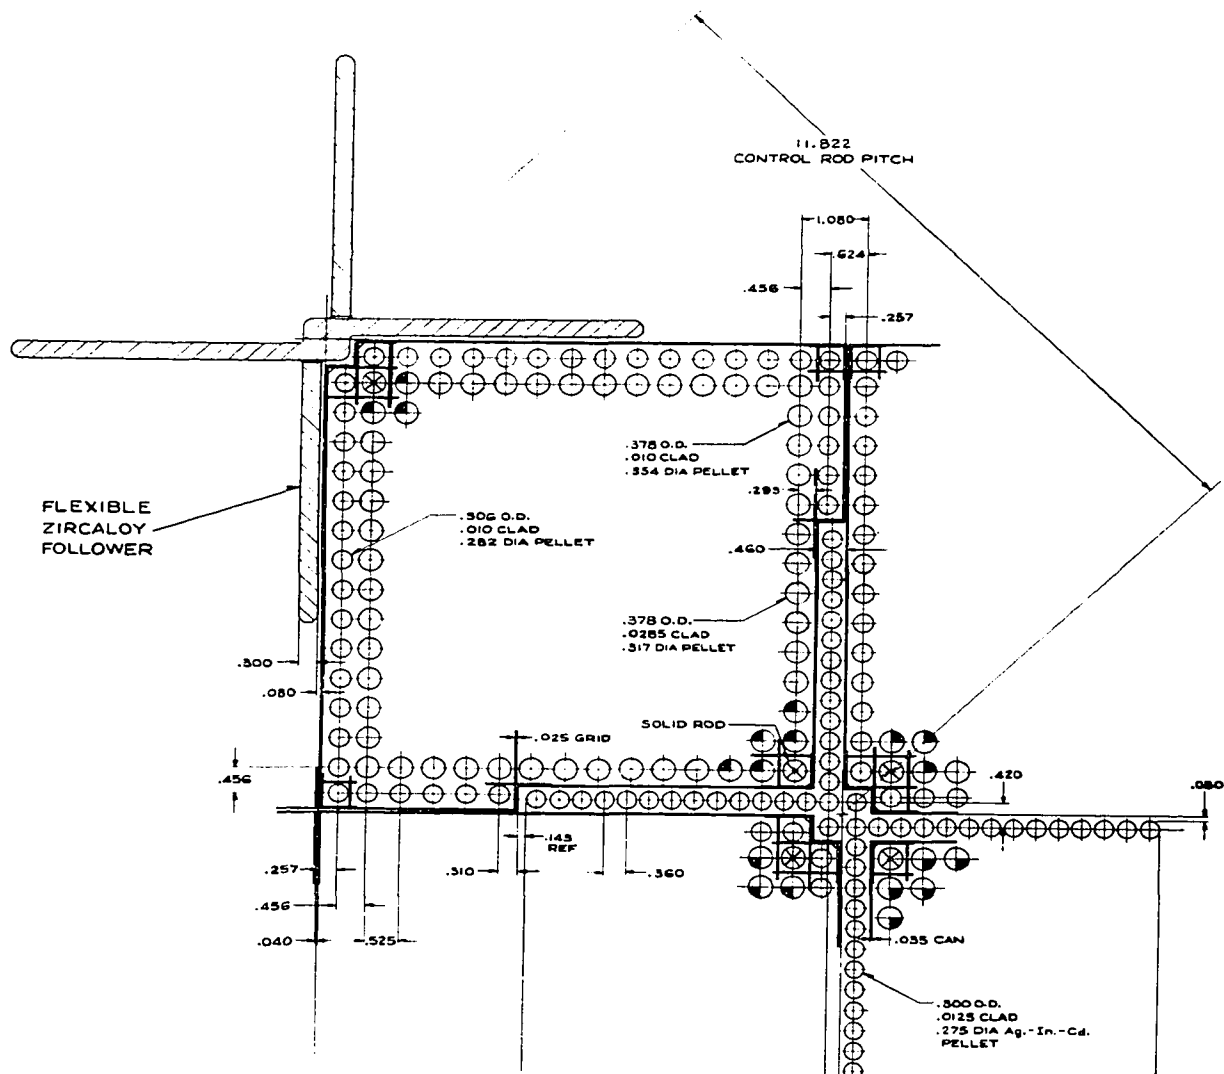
Horizontal Cross-Sectional Diagram of LWR Fuel Assembly and Cruciform-Shaped Control Rod (after ORNL-3686)
